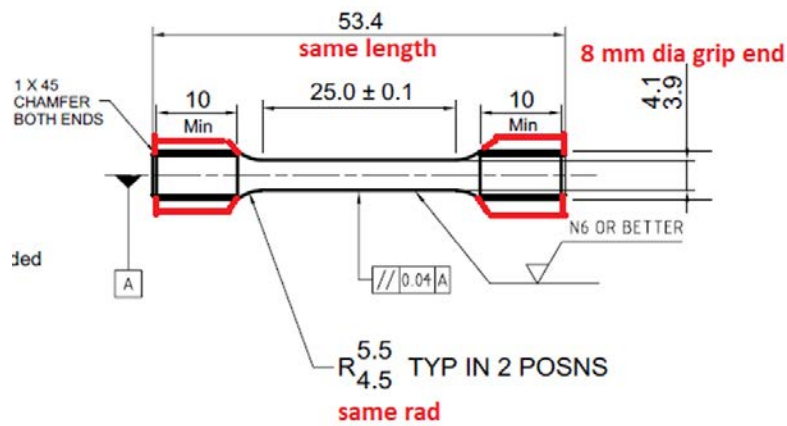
Round bar tensile specimen drawing. Dimensions adhere to the ASTM E8M standard.
